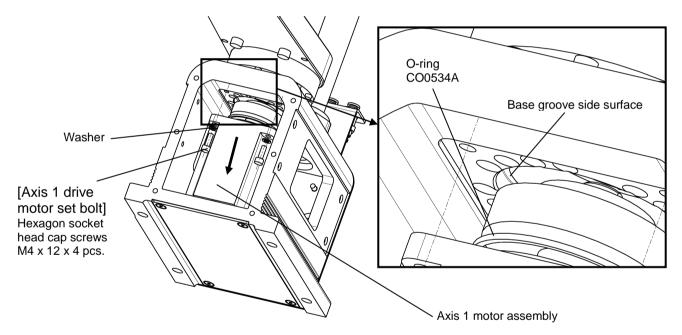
Dismounting axis 1 motor assembly (KHL-300, KHL-400)
